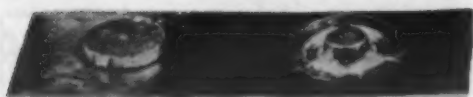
A small silver contact cold welded to a copper strip.
